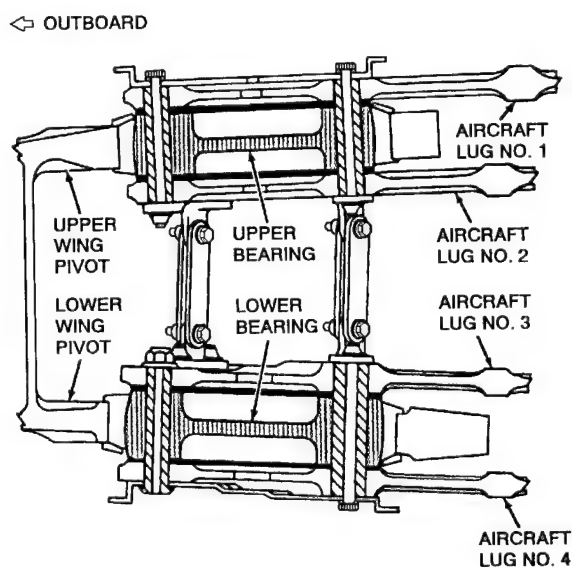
Cross Section of the Wing Pivot Bearing Assembly.
